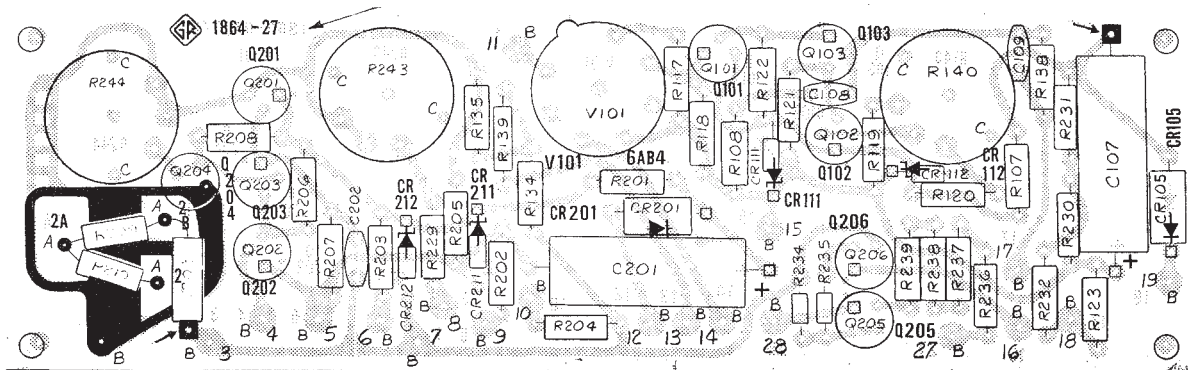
Regulator and amplifier circuits etched-board assembly
